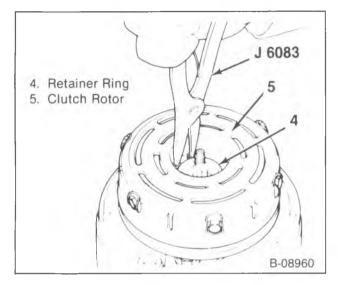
Removing the Rotor and Bearing Assembly Retainer Ring
